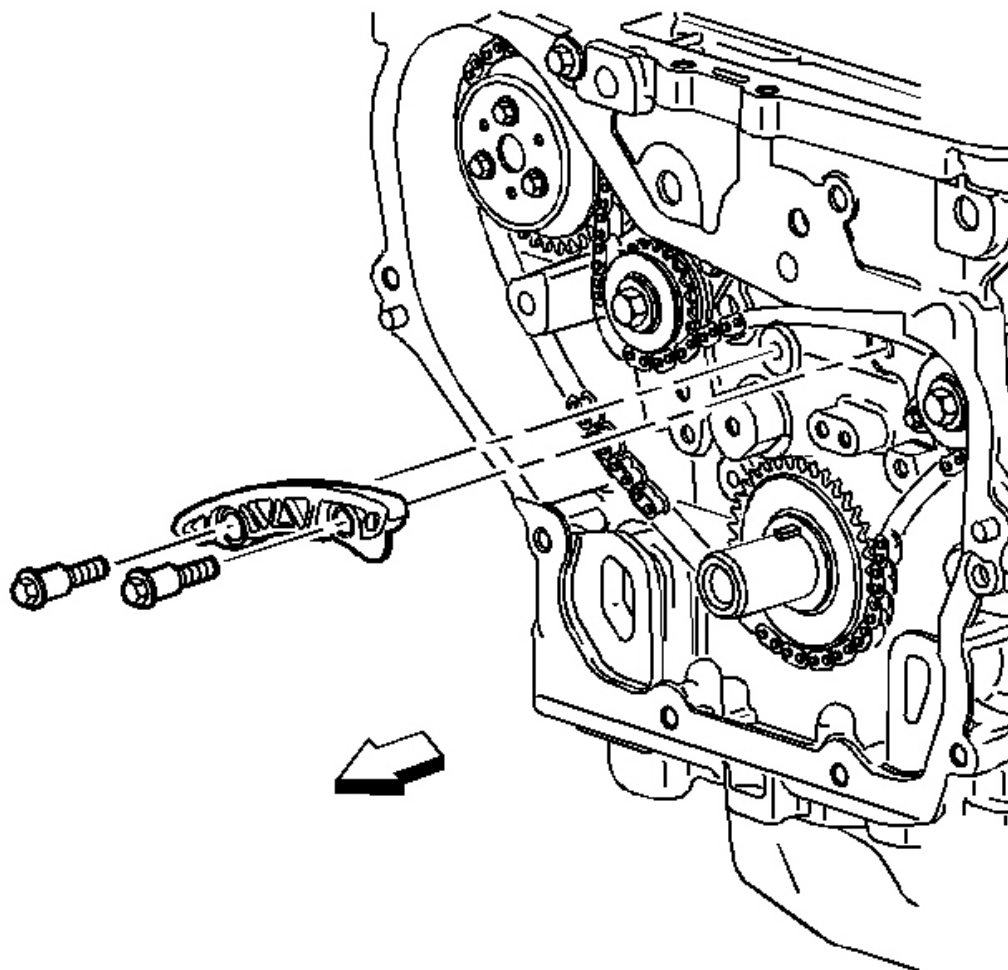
View Of Upper Balance Shaft Drive Chain Guide
